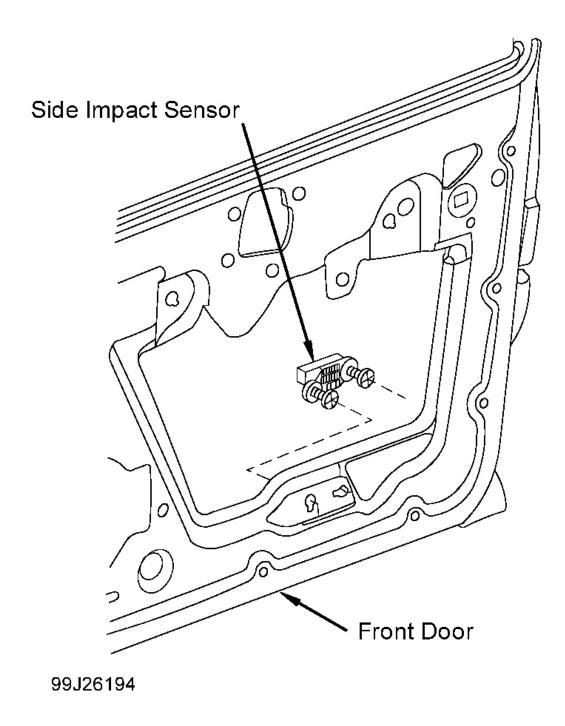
Identifying Side Impact Sensor (SIS) Courtesy of ISUZU MOTOR CO.
